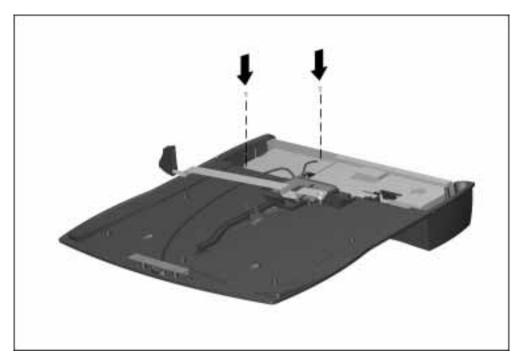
Reinstalling the LAN card Access Shield and screws
